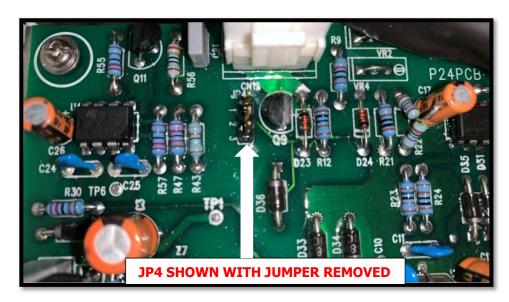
S2A-349 20A ESCR Control Board JP4 Location
